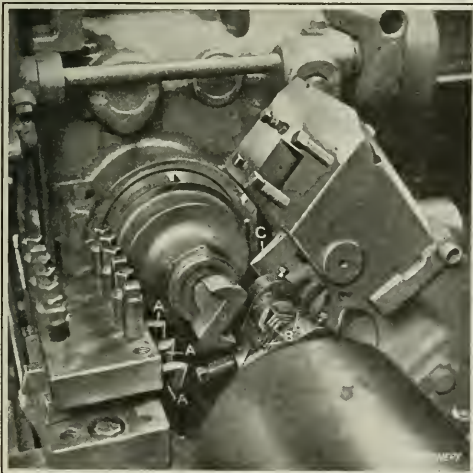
Fay Automatic Lathe equipped for turning Outside Diameter, finishing Ring Grooves, and facing Closed End
